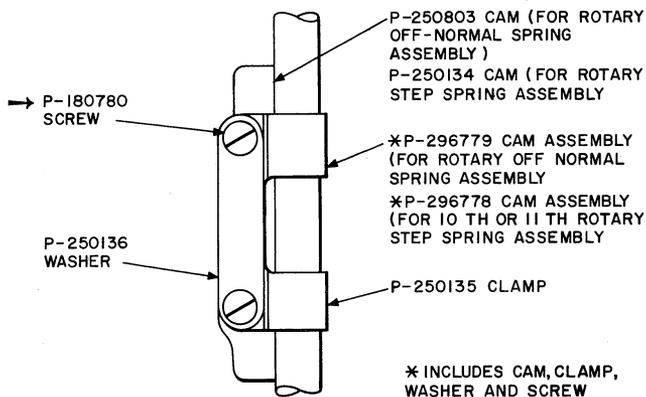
Parts for Cam Assembly Used with Separate Rotary Off-Normal or Rotary Step Spring Assembly
